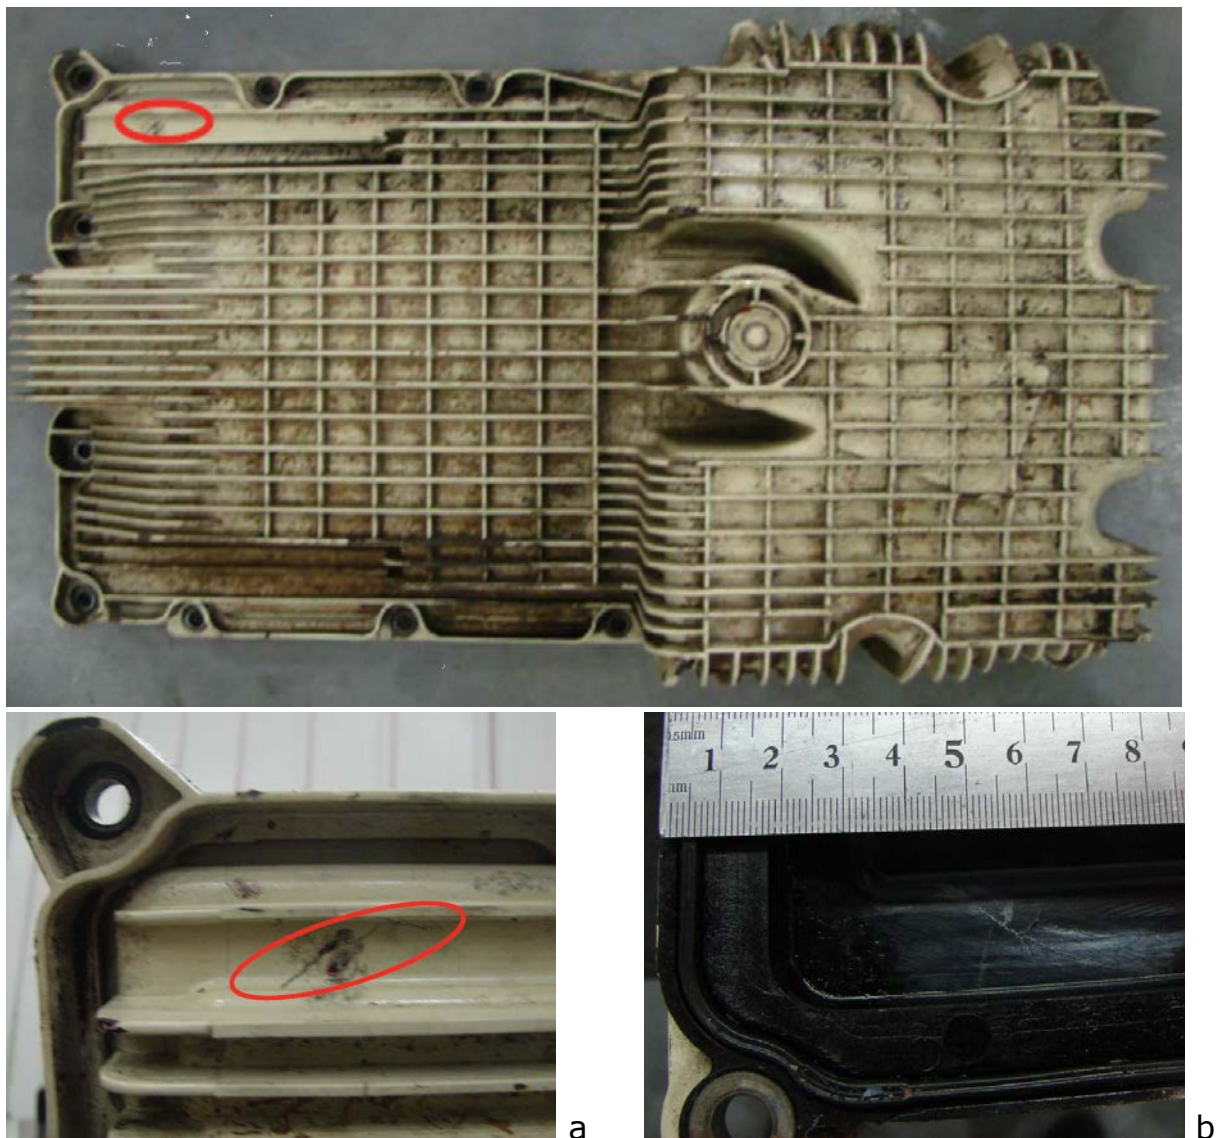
Thermoplastic oil pan crack failure, a) outer side, b) inner side [2]
